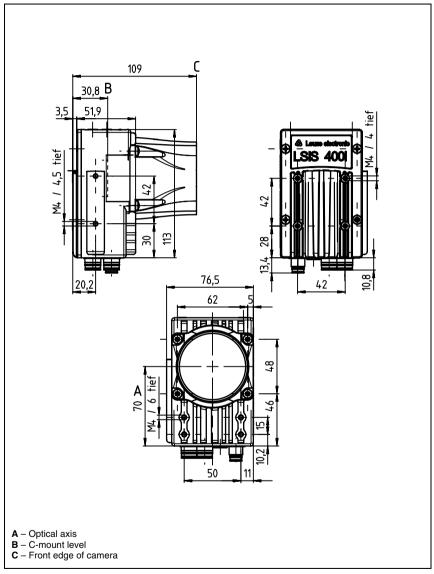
Dimensioned drawing of the LSIS 4xxi smart camera - devices for C-mount lenses
